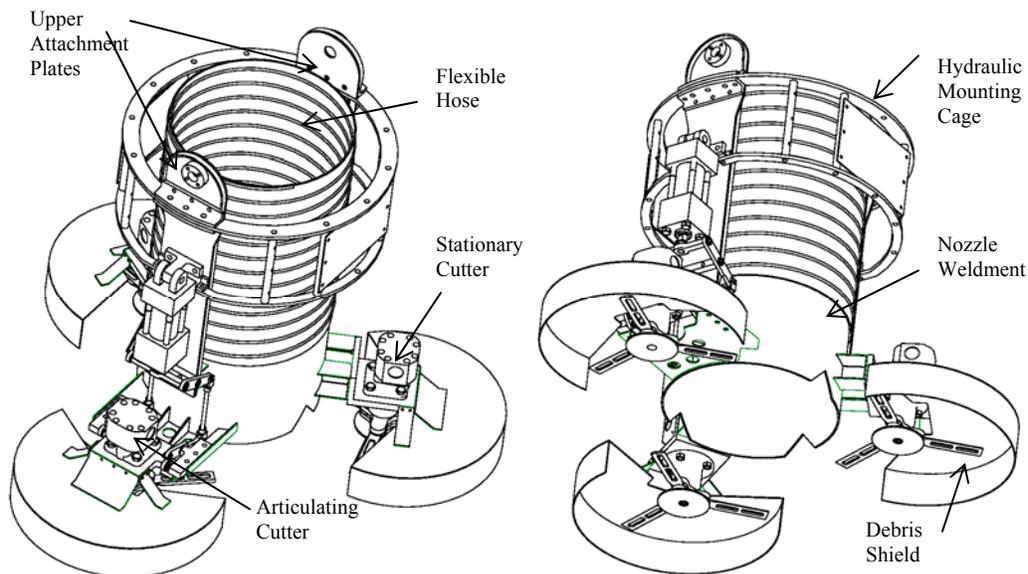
Rotary Impact Cutting Fixture Final Assembly
